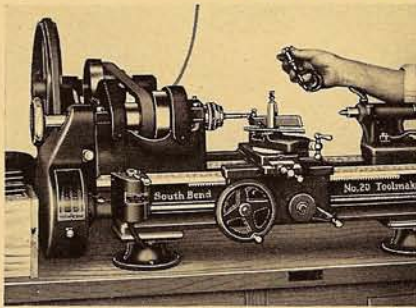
Machining Small Duplicate Parts Held in the Draw-in Collet Chuck.
